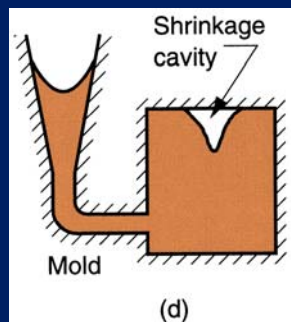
Some common defects in castings: (d) shrinkage cavity
